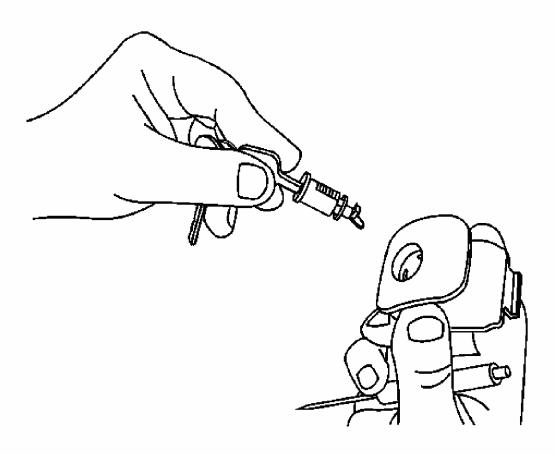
Removing/Installing I/P Compartment Door Lock Cylinder Courtesy of GENERAL MOTORS CORP.
